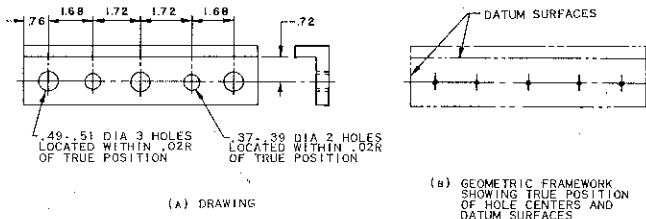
here all the holes are located on a straight center line and the linear position of each hole is specified by basic dimensions. Note that chain dimensions can be used because true position tolerances are not cumulative.
